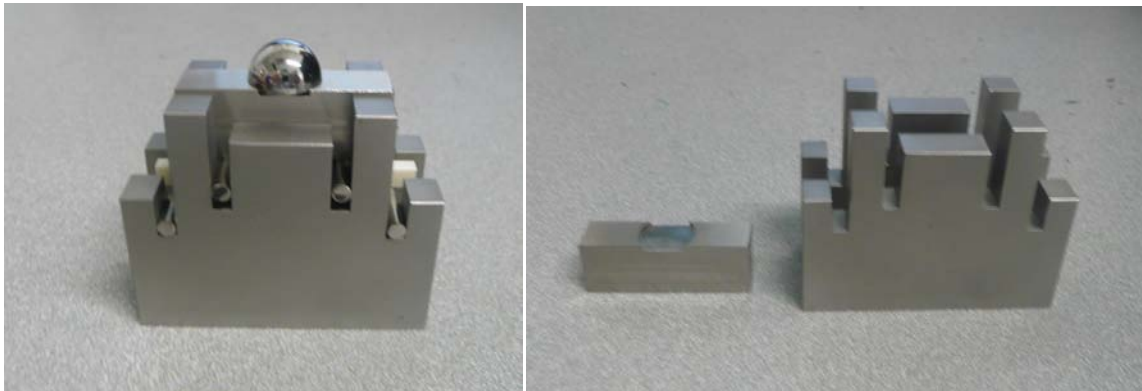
(a) Test fixture setup at room temperature (b) Detailed view of top part and bottom part of test fixture
